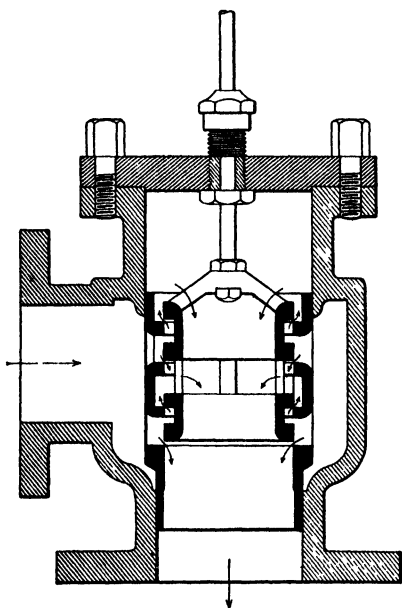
Section of Valve and Valve Seat of Waters Governor
